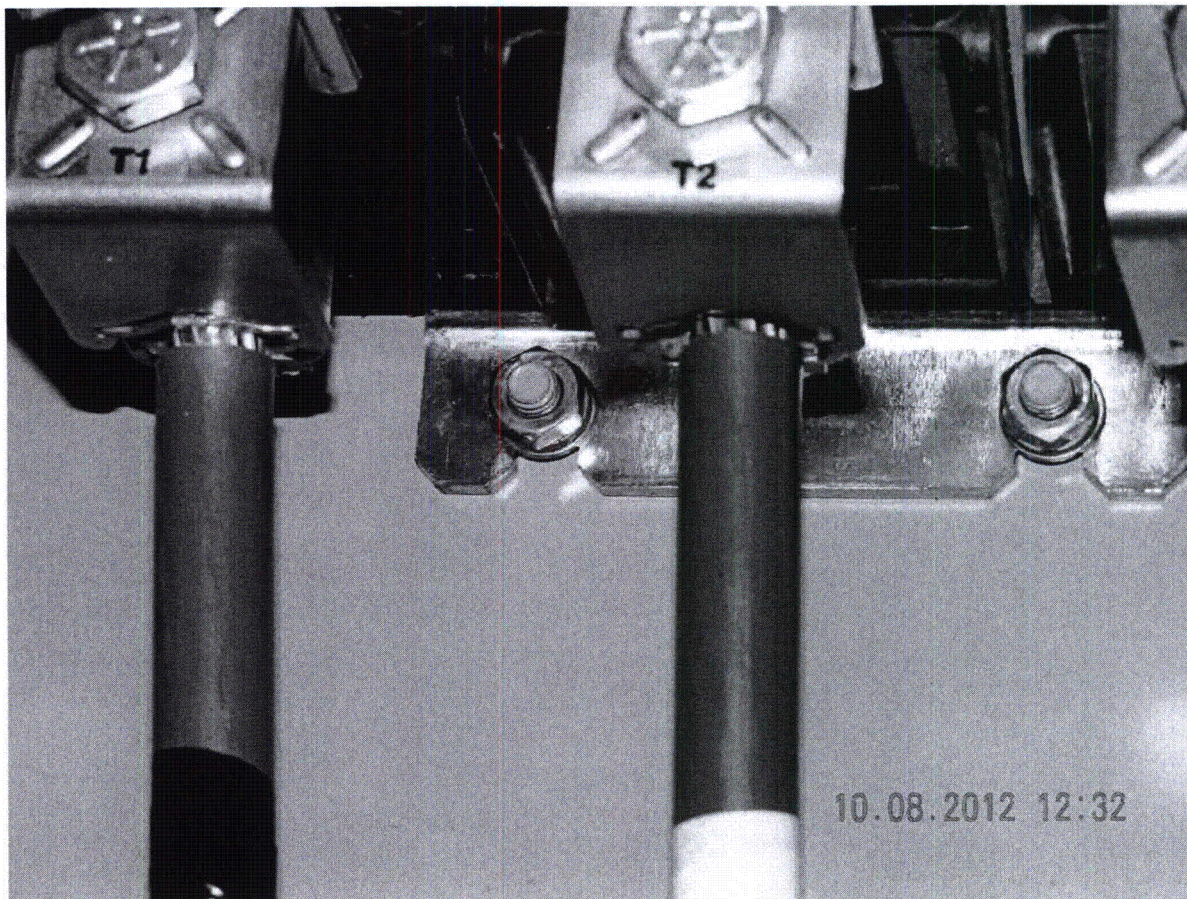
, Close-Up View of Bolts Securing Contactor to Mounting Plate
